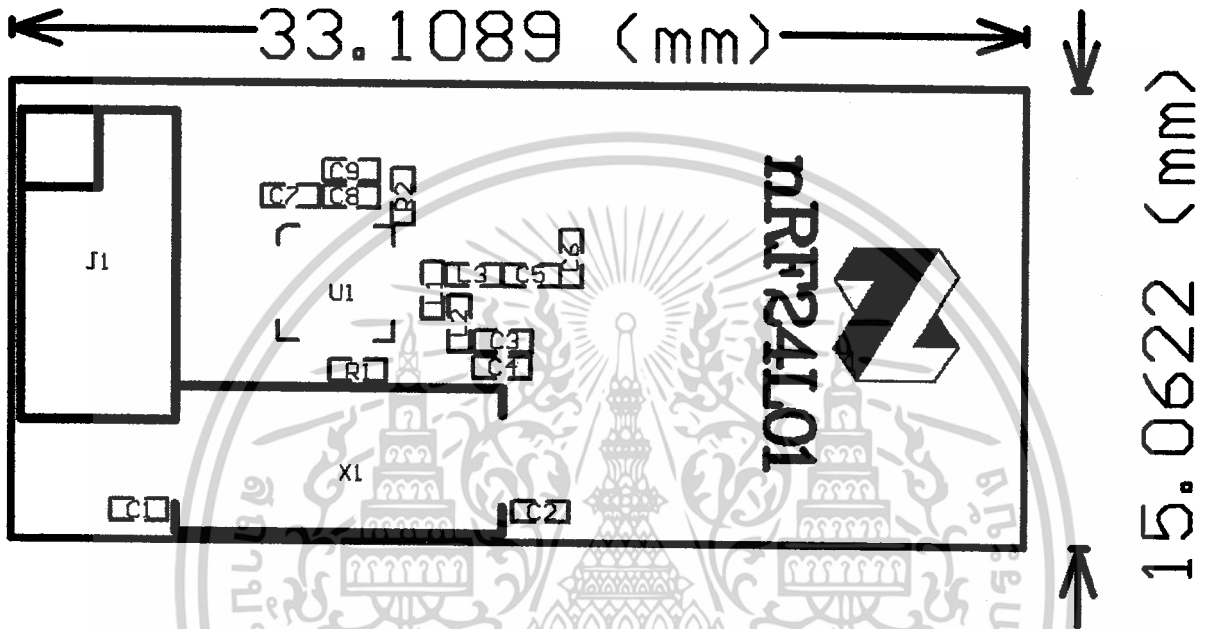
Top overlay (nRF24L01 RF layout with single ended connection to PCB antenna and 0402 size passive components)
